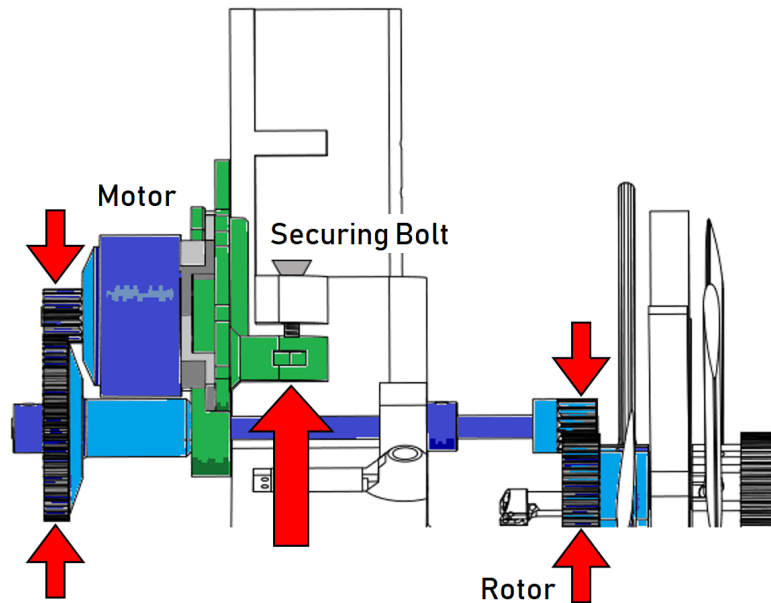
Anti-slip solution via intentionally misaligned driveshaft. 3D printed gears are shown in light blue, while metal parts are shown in dark blue. The motor housing (green) slides vertically, allowing a single bolt to re-orientate the driveshaft and thoroughly compress all gear linkages in the drivetrain.
